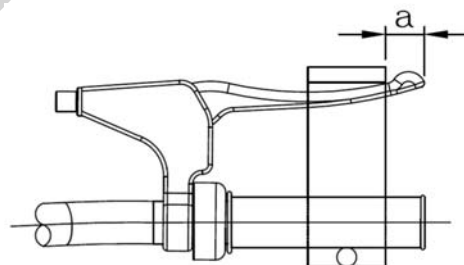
Method of fitting the gauge to the brake-lever and handlebar
